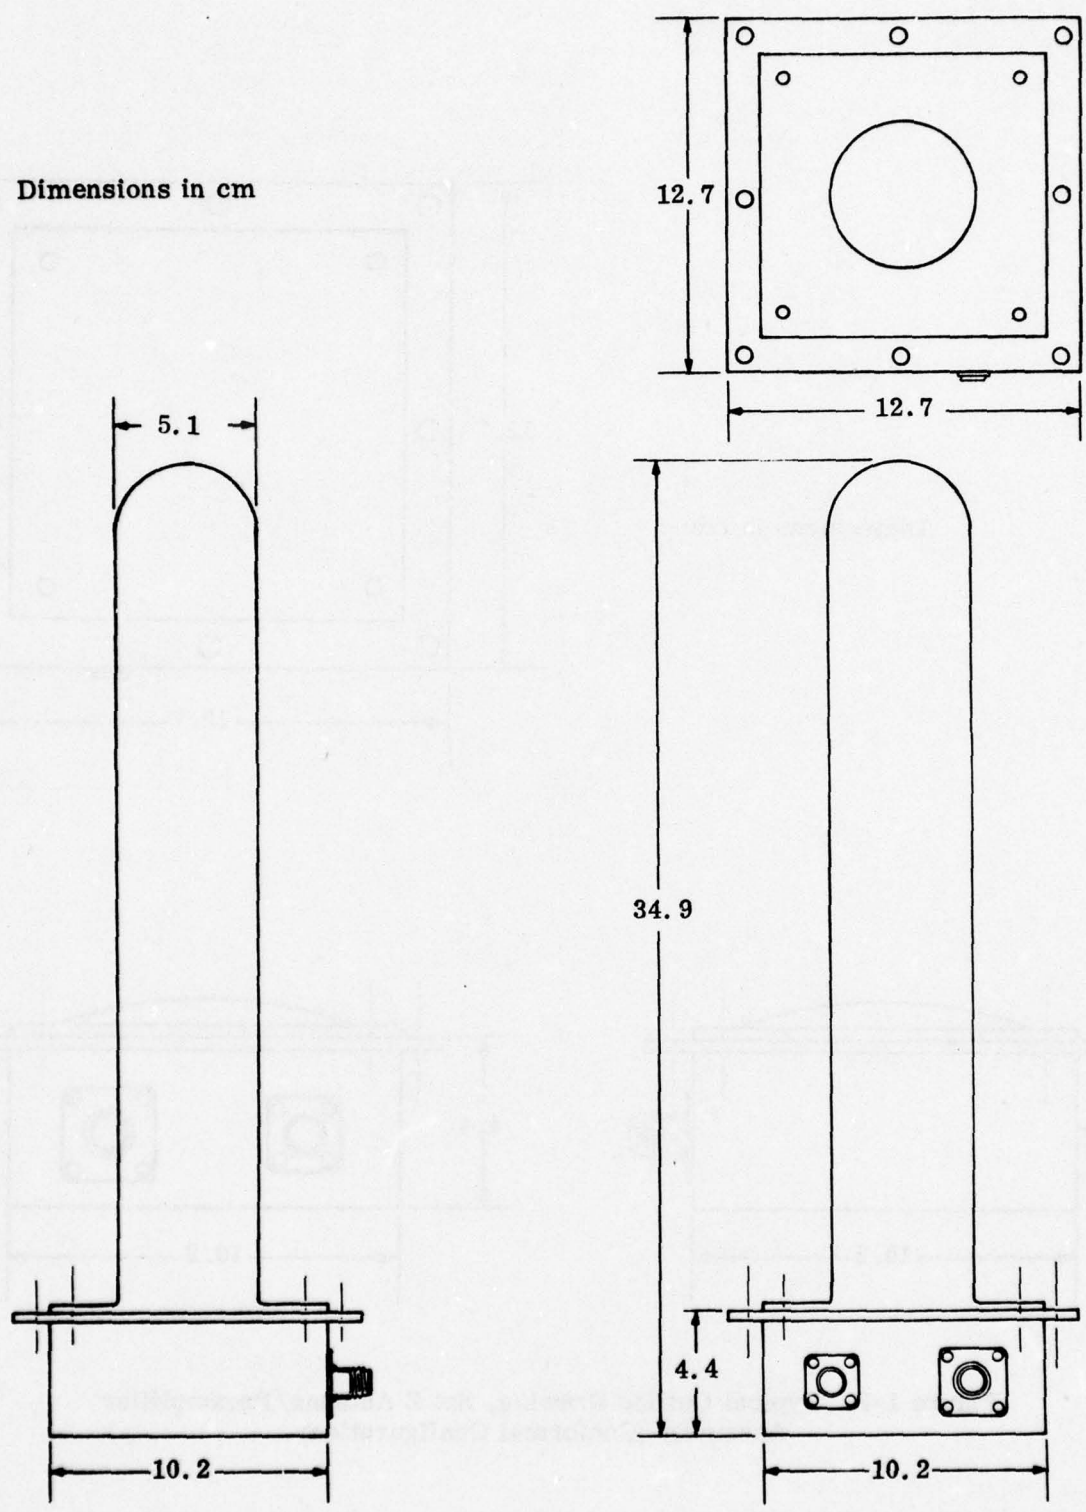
Typical Outline Drawing, Set Z Antenna/Preamplifier Assembly (Volute Configuration)
